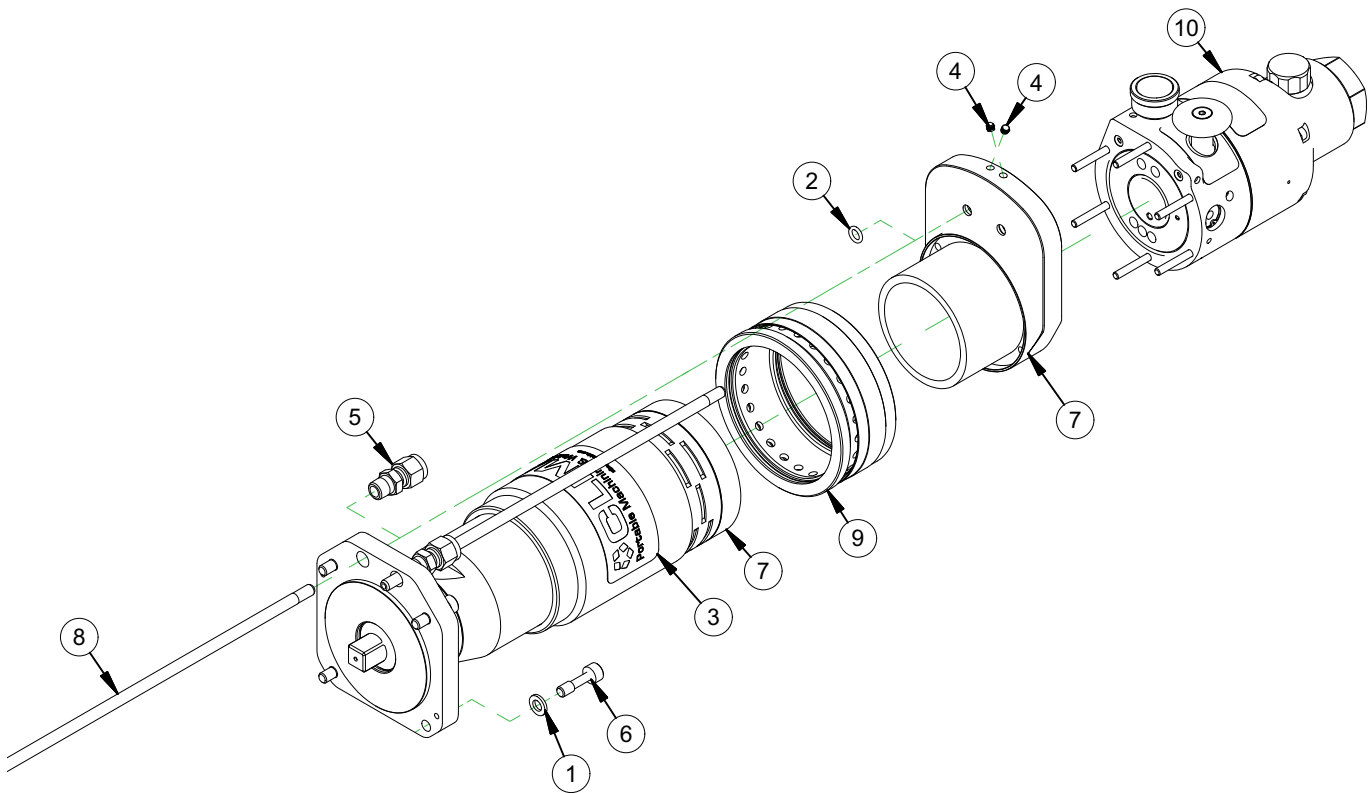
P/N 85590 PD3000 RIGHT ANGLE GEARBOX ASSEMBLY
